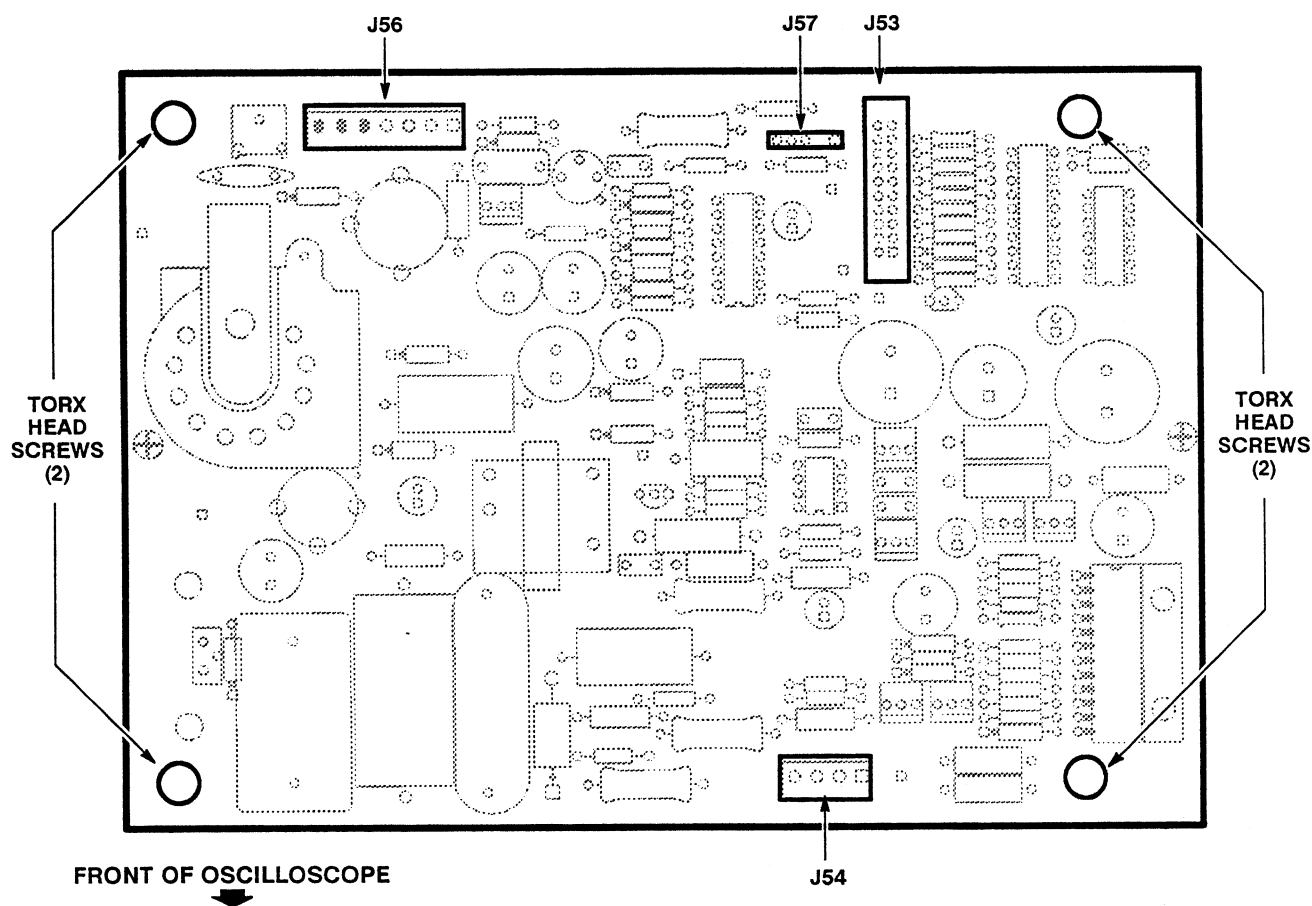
Removing and Replacing the A8 CRT Driver Board
